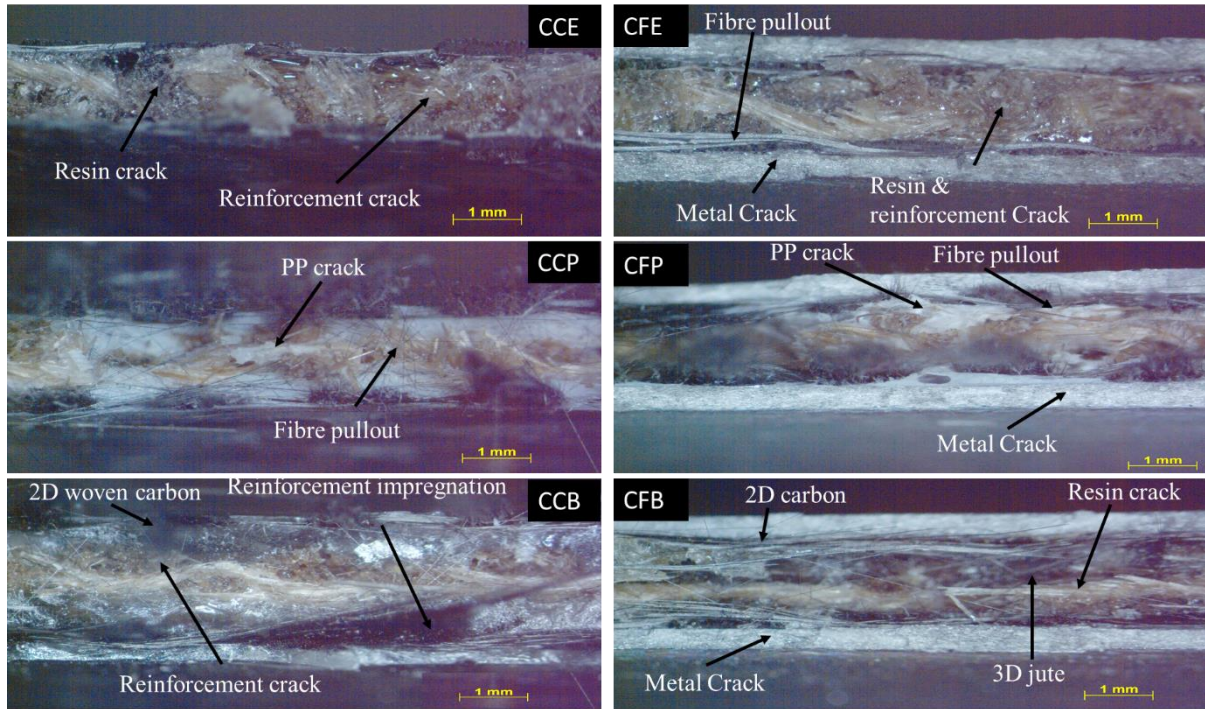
The cross-section of fractured face of samples after the tensile test of 2D carbon + 3D jute composite and FMLs
